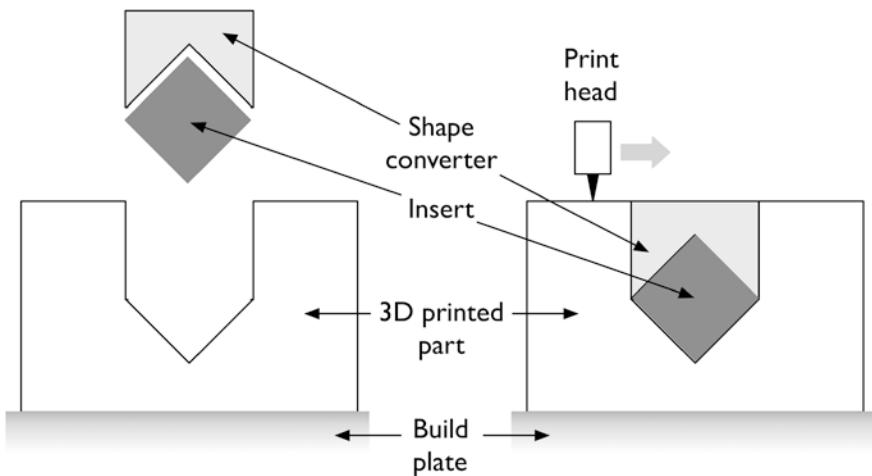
A shape converter is assembled with the insert, converting the geometry to vertical sides and horizontal top, removing collisions
